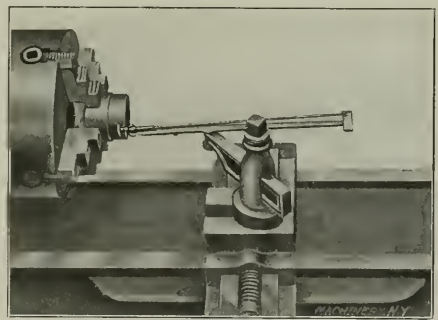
The Indicator in use Truing the Outer Surface of Work Held in a Chuck.
